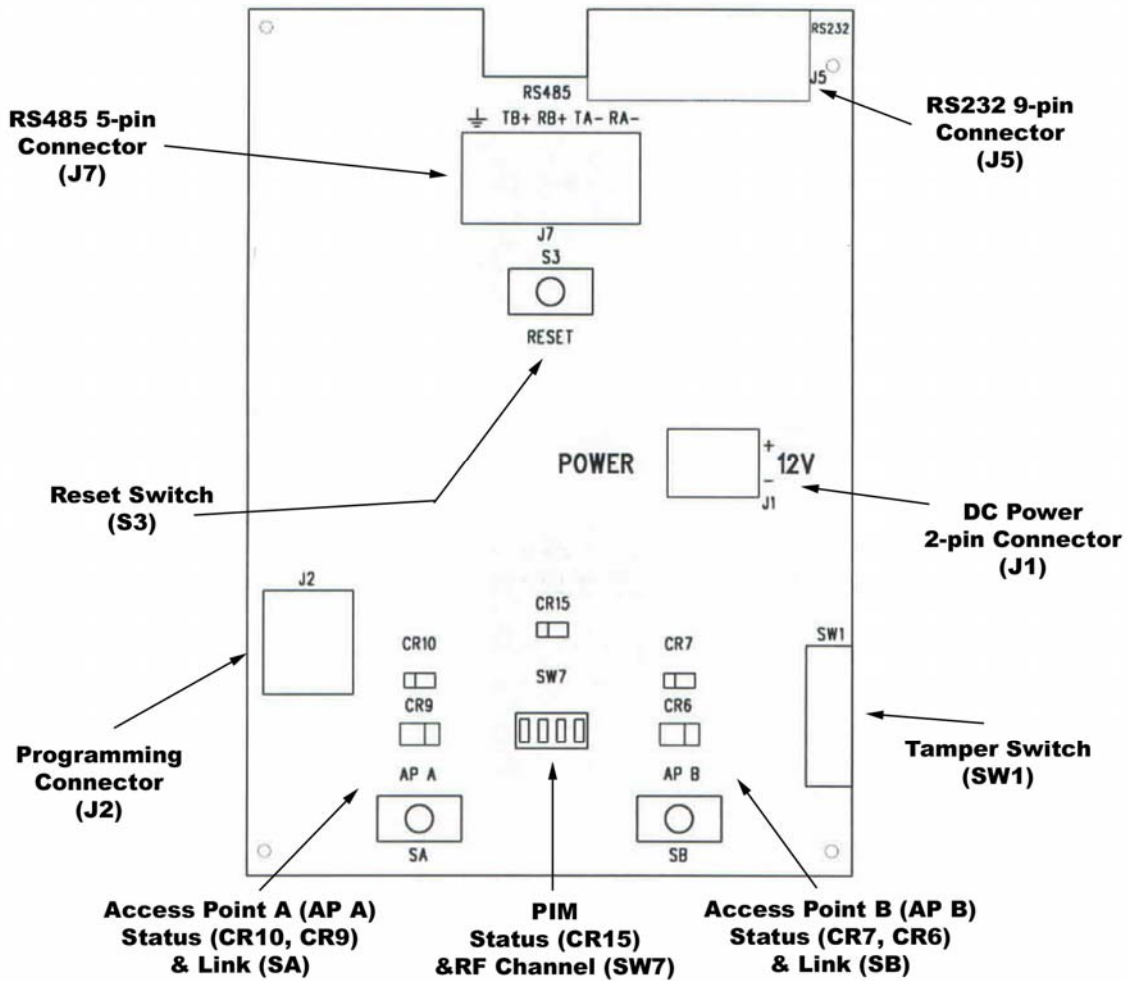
RS485 PIM & PIME Printed Circuit Board (PCB)
